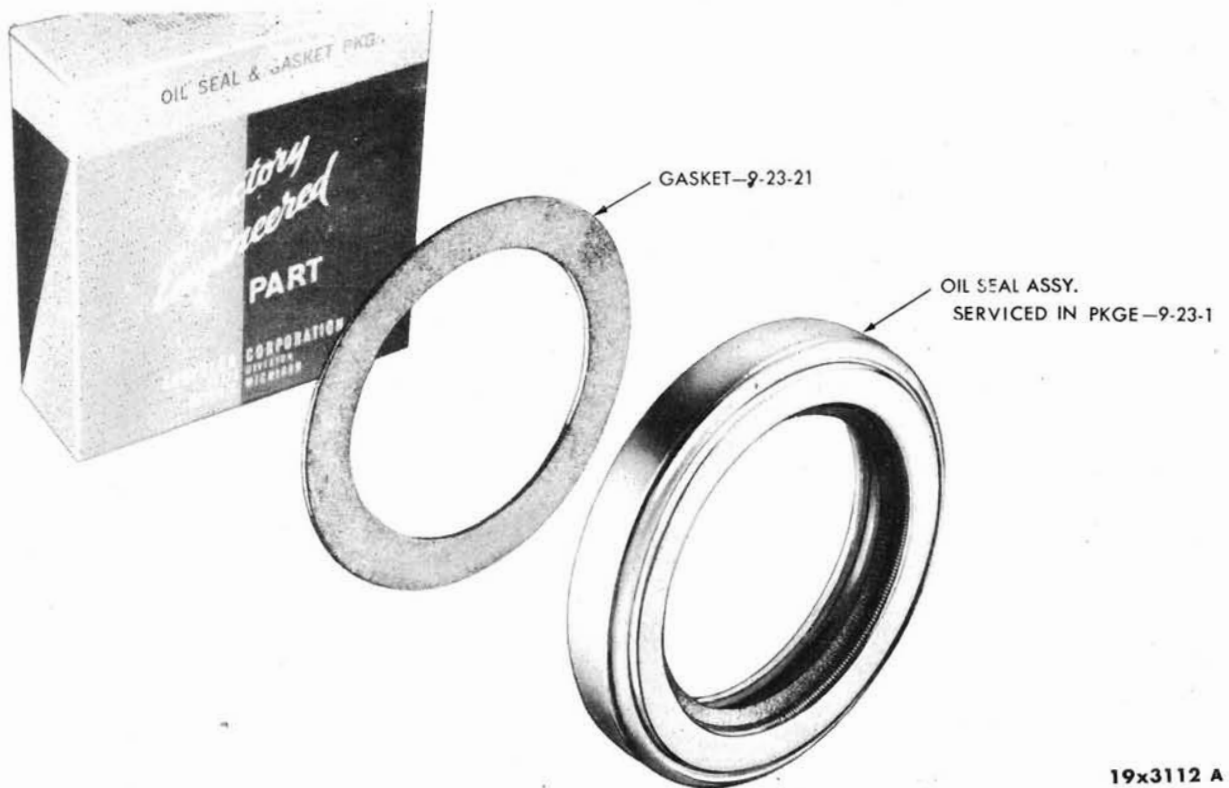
MOPAR CHAIN CASE OIL SEAL PACKAGE (9-23-1)
